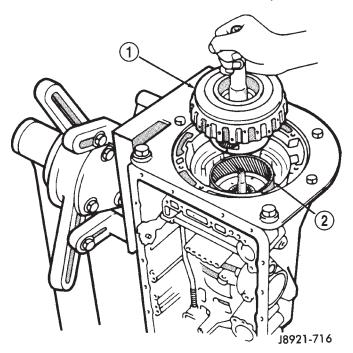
Installing Overdrive Planetary And Clutch Assembly
